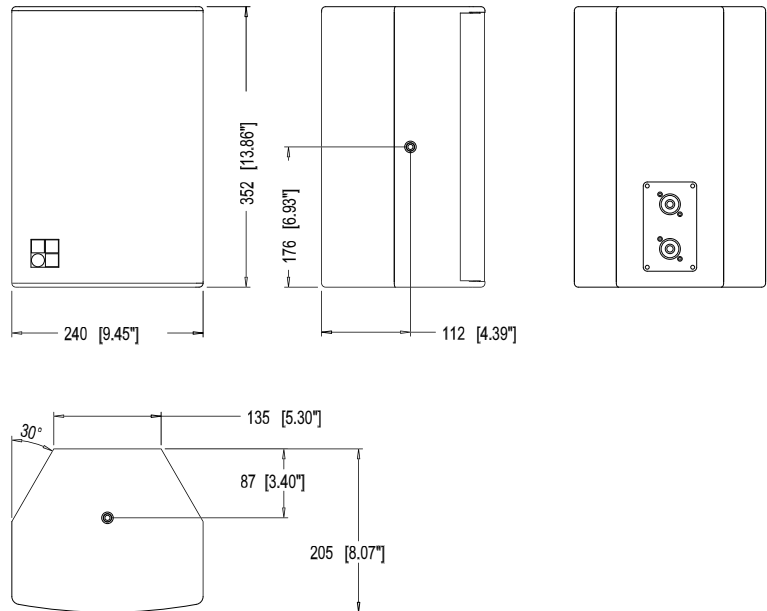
Ci80 cabinet dimensions in mm [inch]
